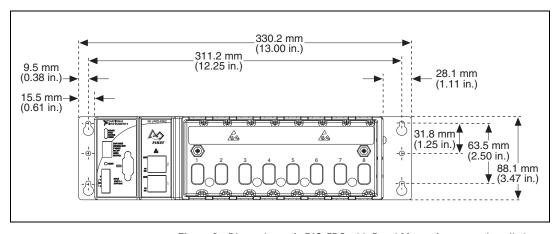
Dimensions of cRIO-FRC with Panel Mount Accessory Installed
